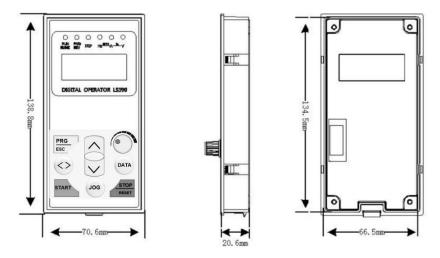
Keyboard Operator Outline and Installation Dimensional Drawings
